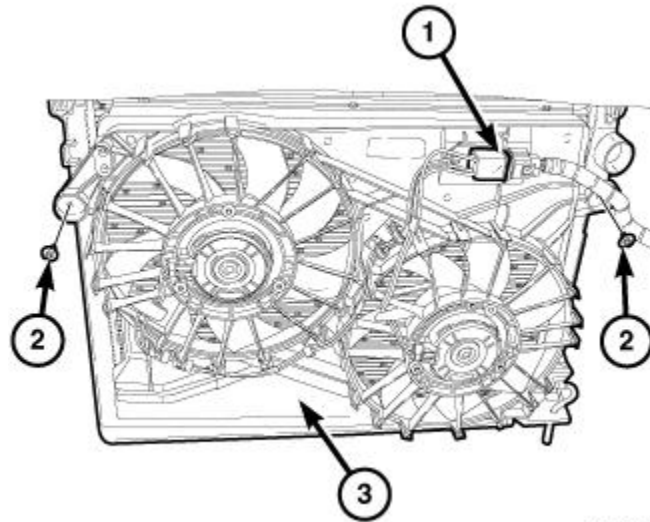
Radiator Cooling Fan Assembly & Radiator Mounts
